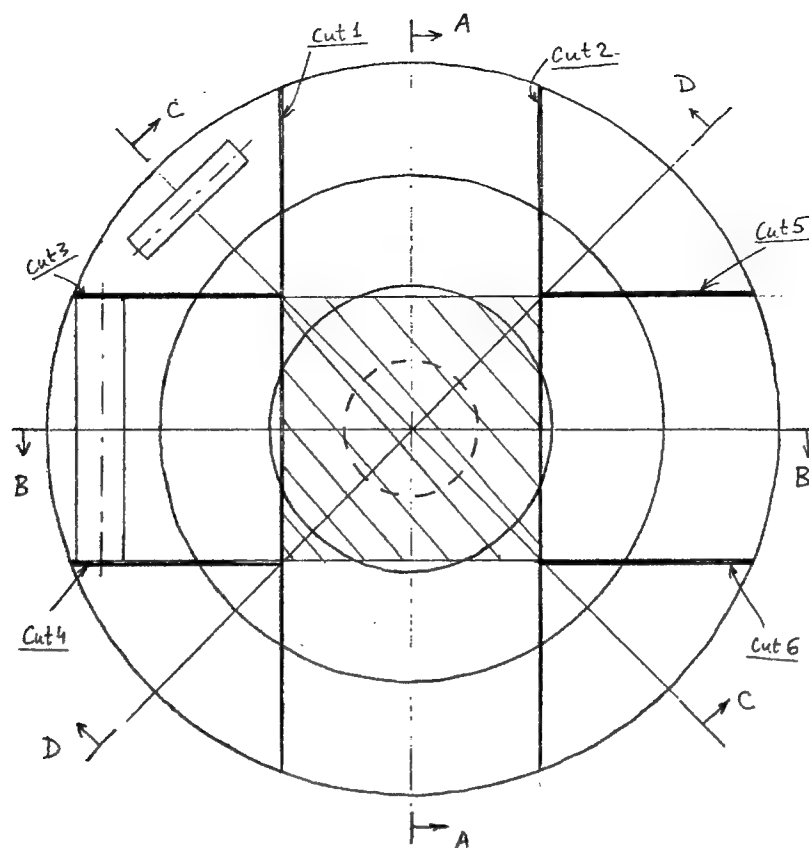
Ti-6-2-4-2 SPECIMEN CUTUP PLAN (TOP VIEW)
